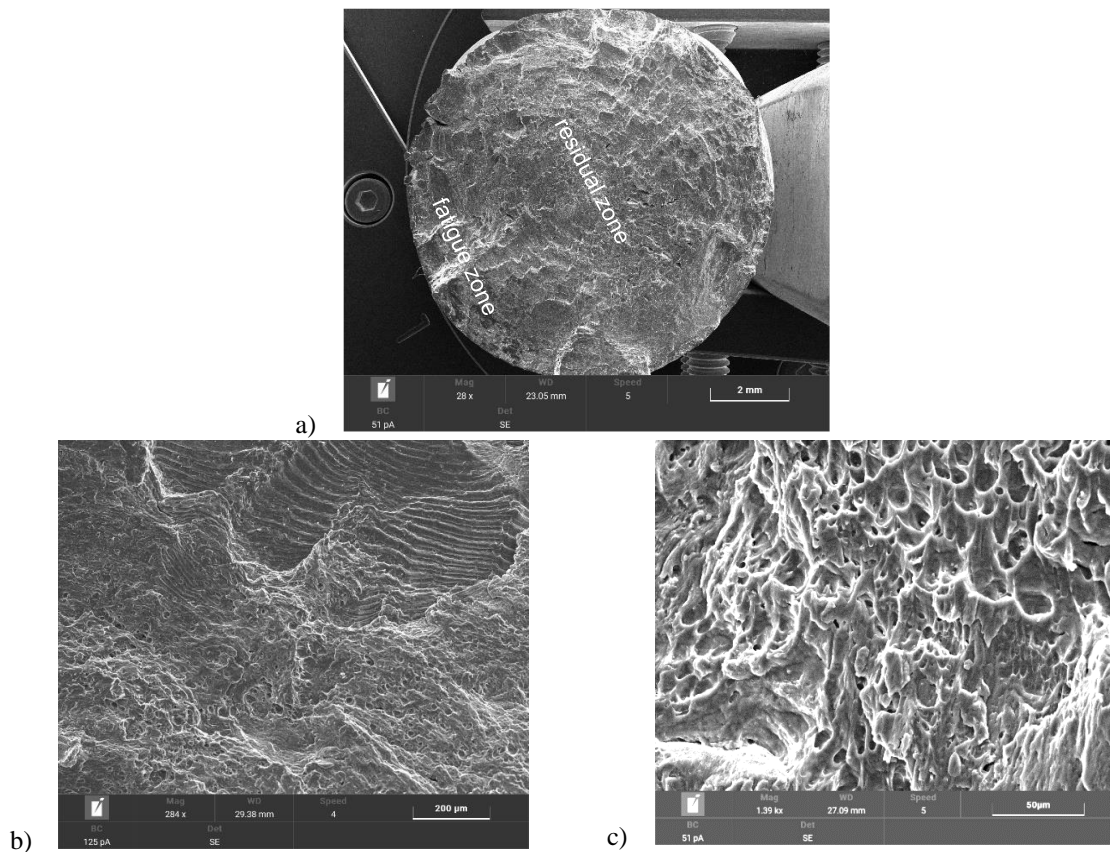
Fatigue fracture of the alloy after T64 treatment caused by combination of bending and torsion $\tau_a = \sigma_a$, a) fracture morphology, b) fatigue bands in the fatigue zone, c) surface in the area of the residual zone (specimen 44 – 44 788 cycles).
